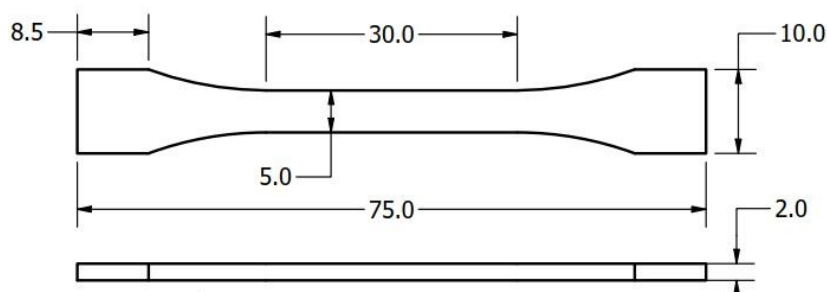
2D CAD models of JIS K7139-A32 tensile test specimen (all dimensions are in mm).
